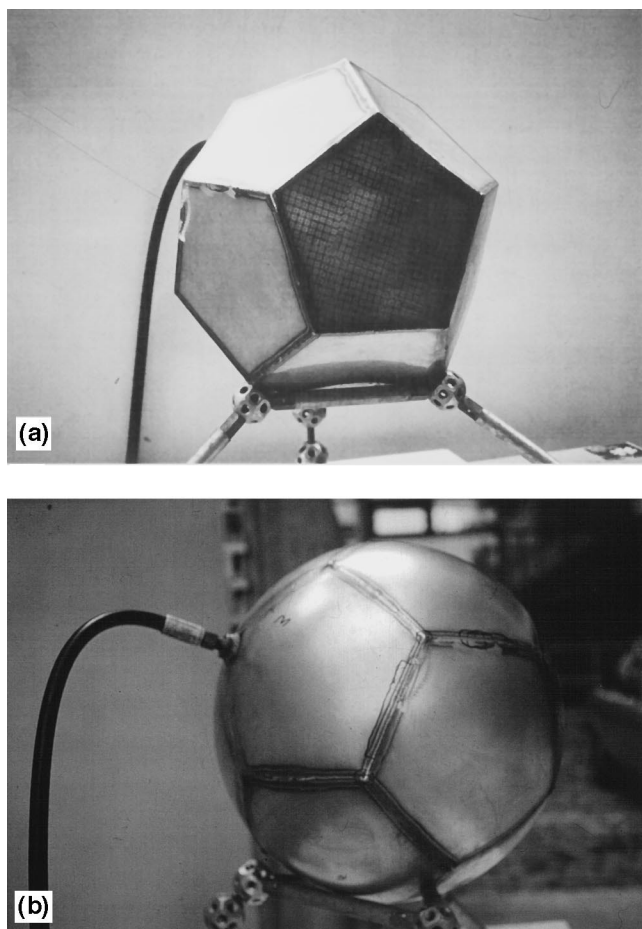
A dodecahedron welded from 12 equal plane stainless steel sheet pentagons. a) before and b) after inflation.
